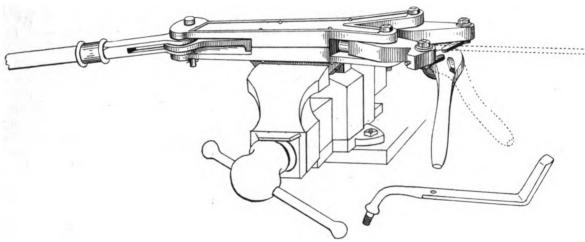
MACHINE FOR MAKING COLLARS ON CANOPY TOP STANDARDS.
